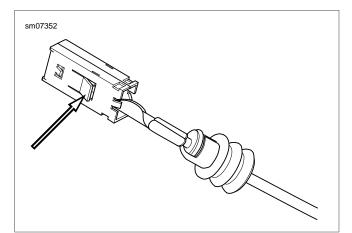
Tangs: Bosch Compact 1.1M Socket Terminal
